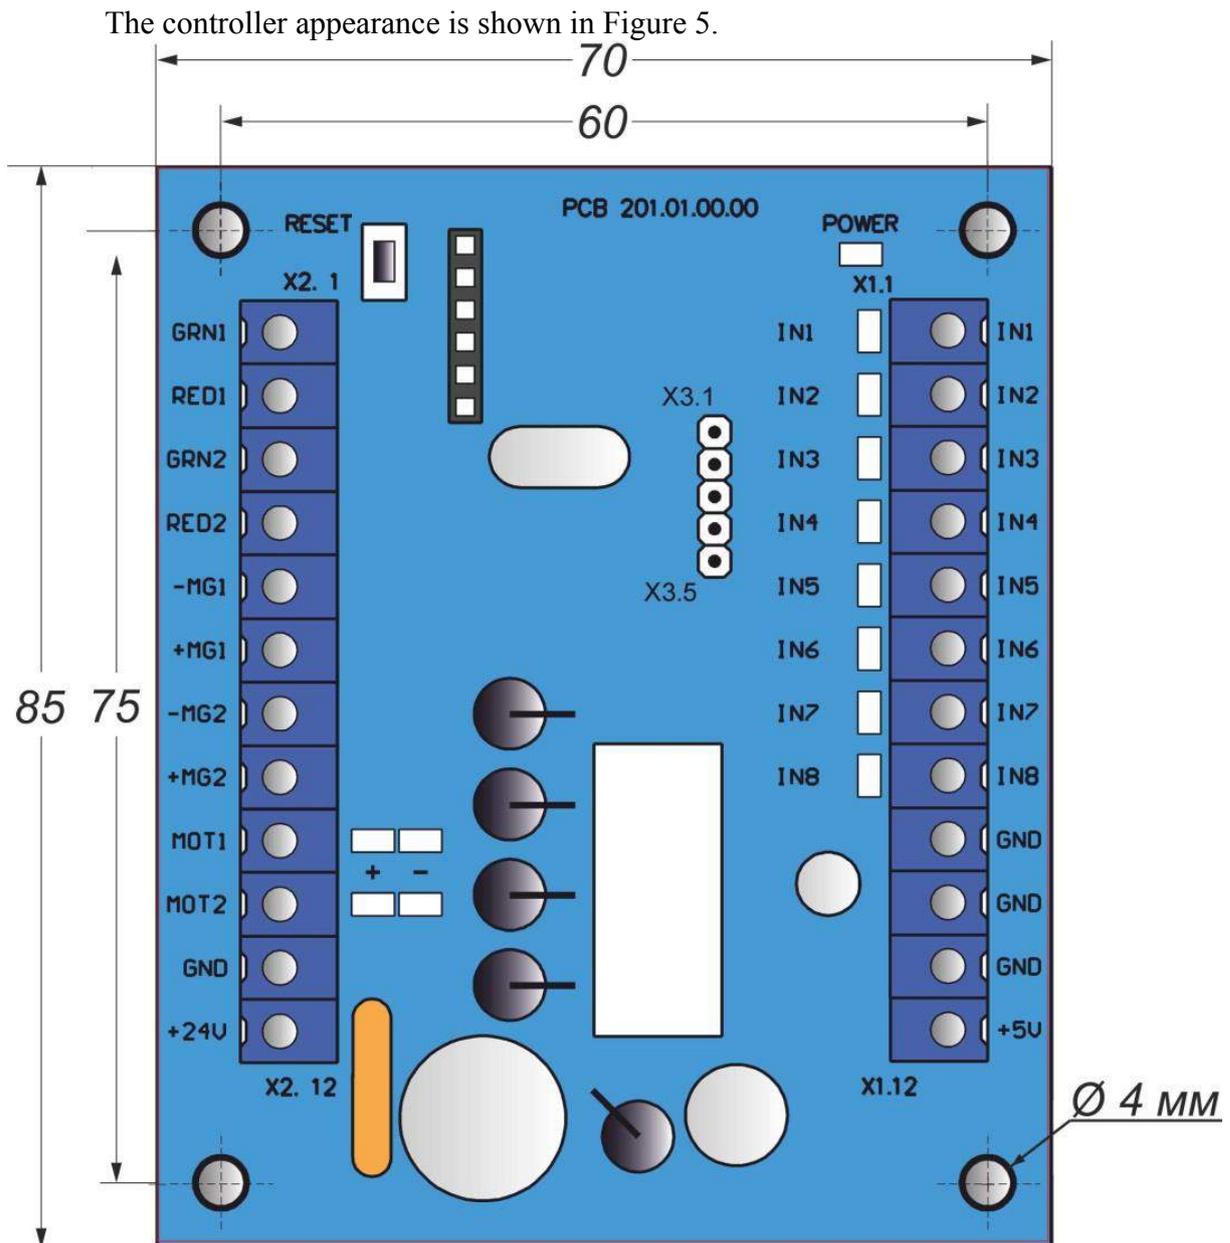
Appearance of the motorized mechanism controller PCB.201.00.00
